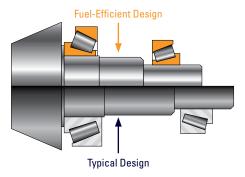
Ability to utilize smaller bearings allows for reduced system size. Less pinion and housing material provides both cost and weight savings.
